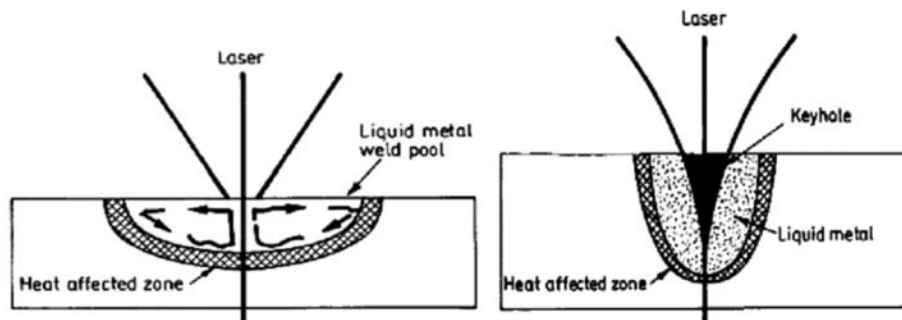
keyhole and conduction mode welds [61]
